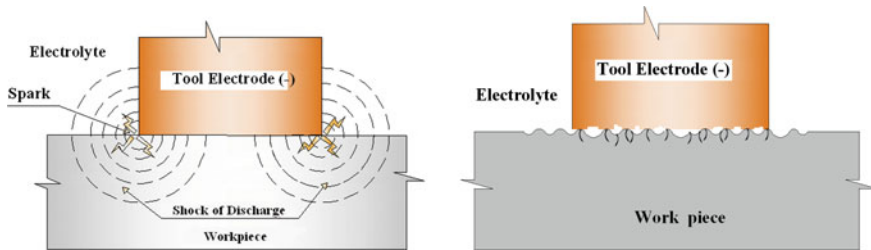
Mechanism of material (tool and workpiece) removal in micro-ECDM
